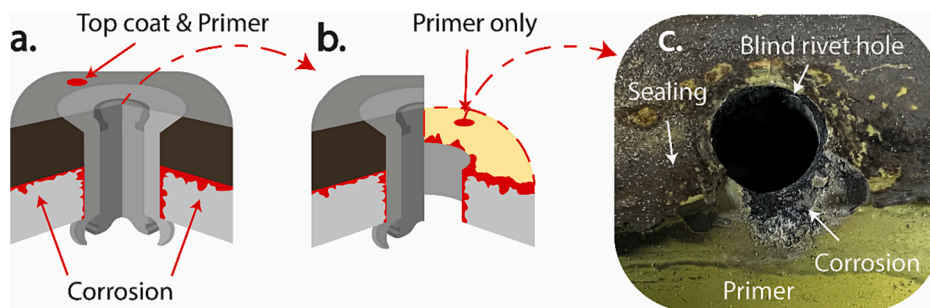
Corrosion evident near the stainless steel blind rivet, utilized for connecting the CFRP skin to the aluminium structure, featuring (a) a cross-sectional view of a blind rivet; (b) the specified field of view for image (c); (c) highlighting the corrosion attack in and around the rivet hole.
